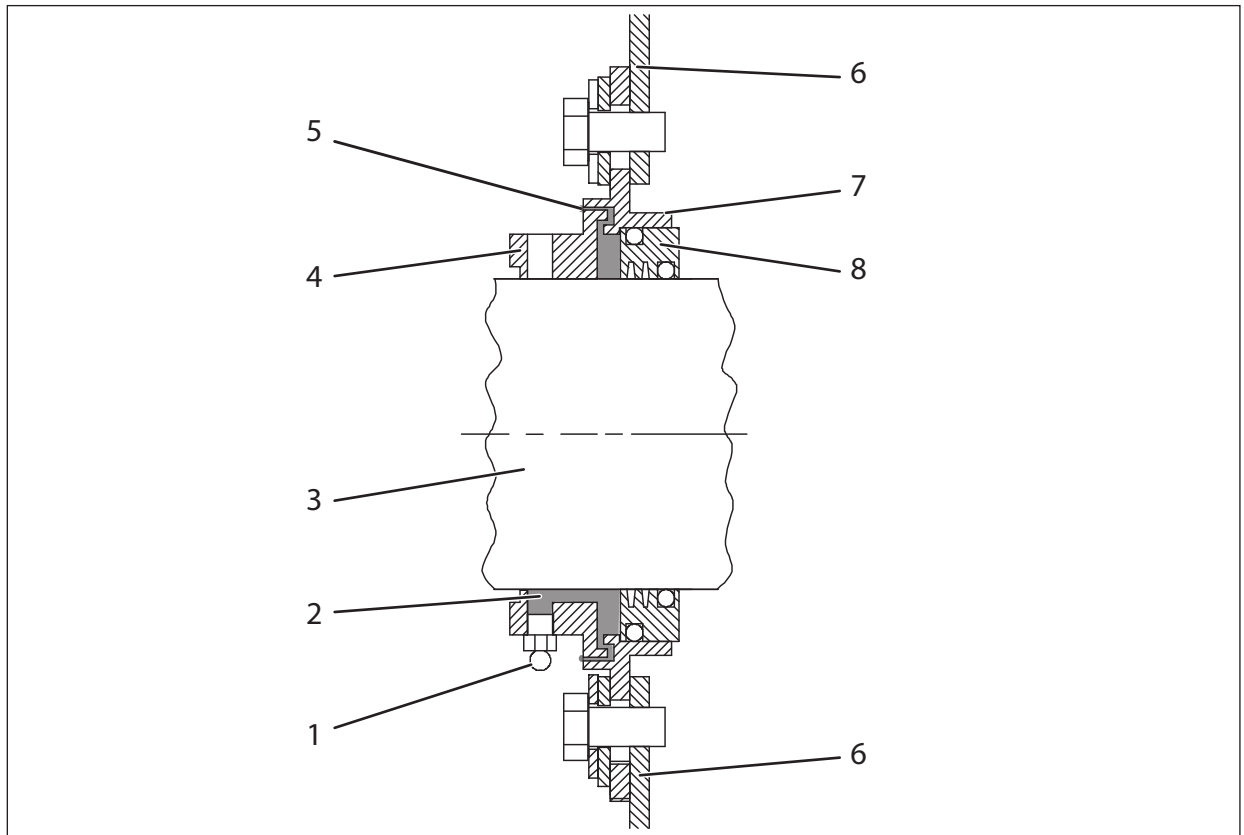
Drive Shaft Oil Seal Cross Section
